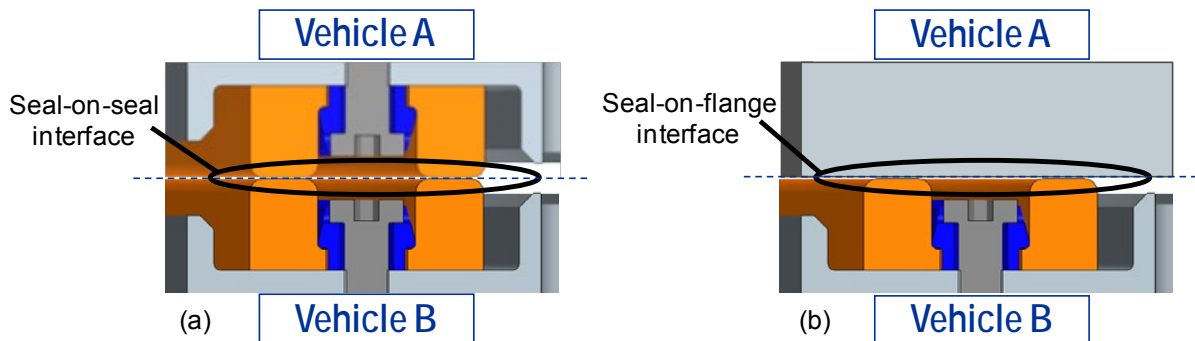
Cross sections through the interface between two mated systems showing (a) seal-on-seal mating and (b) seal-on-flange mating.
